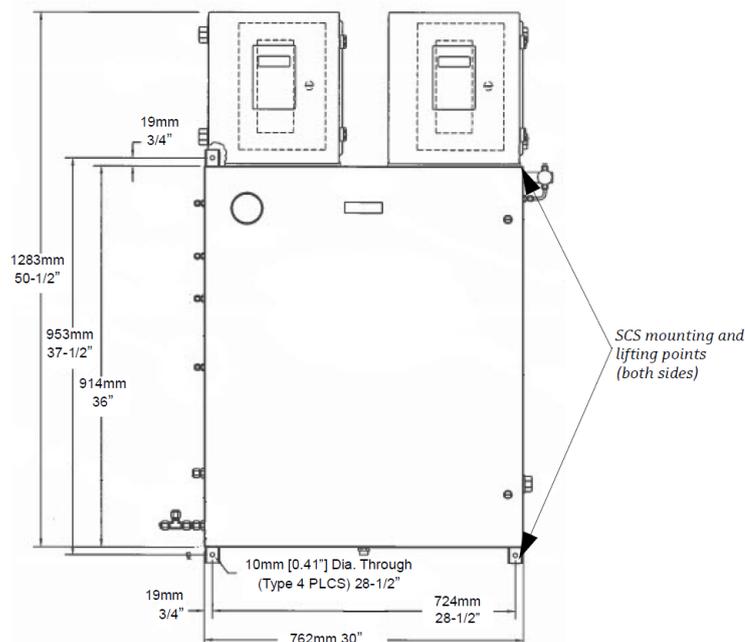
Lifting points and mounting dimensions for the SS2100 2-Pack and 3-Pack TDLAS gas analyzer
